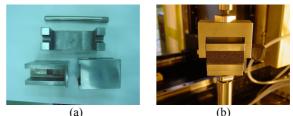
Fixture for the spring test of the grid 1x1 cell specimen.
